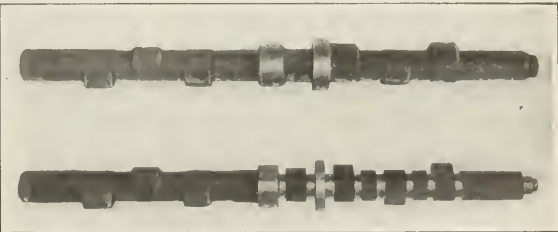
Cam-shaft before and after First Lathe Operations on One End
